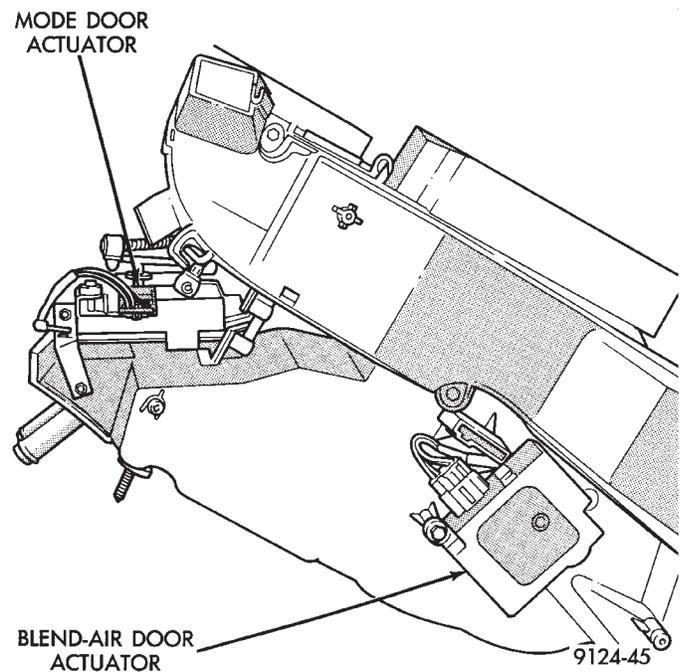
Blend-Air Door Actuator—Mode Door Actuator—View from bottom of A/C Housing
